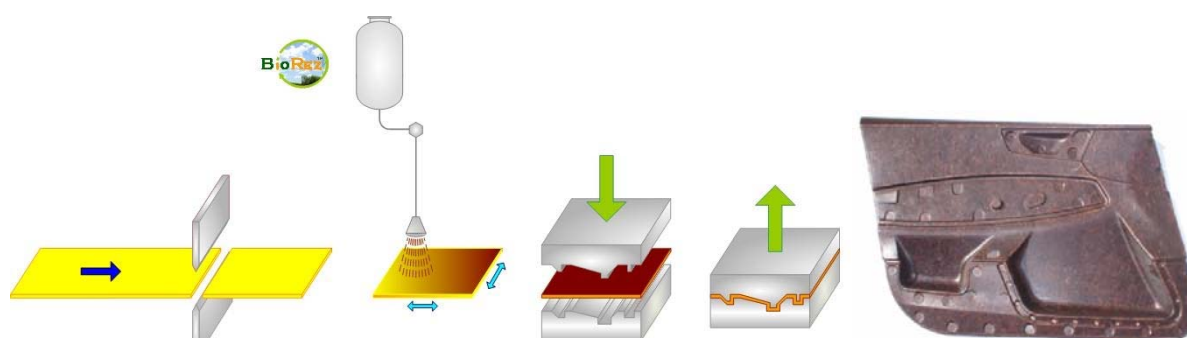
Hot compression moulding of non-woven fiber mats sprayed with a one component resin: the process scheme, the achieved scale of demonstrator manufacturing of an automotive panel
